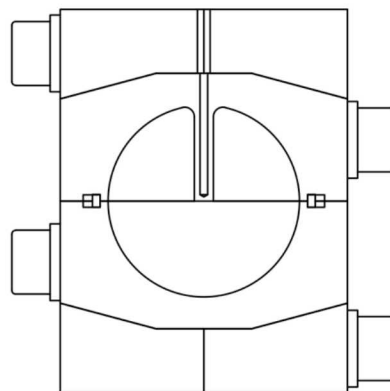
Cross-section of ODTV capsule, showing tapered profiles of inner shells. The capsule axis is horizontal in this view
